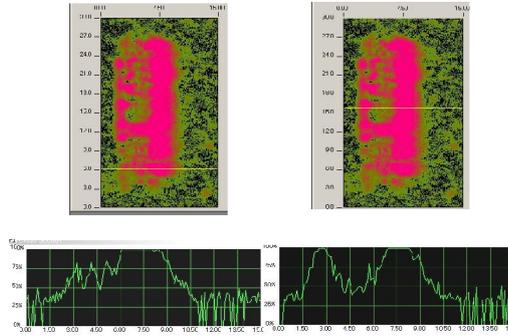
Fatigue crack surface image. Transducer:30MHz, F=25mm.
